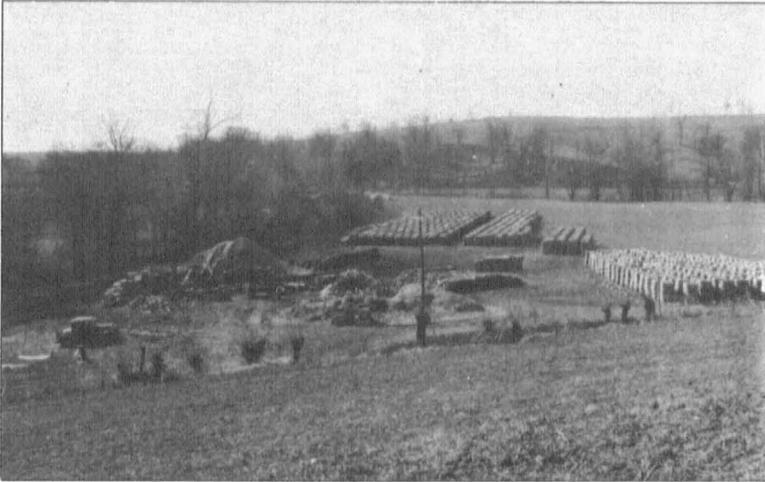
Small portable stave mill with cut staves stacked for drying.—Courtesy Extension Forester.
